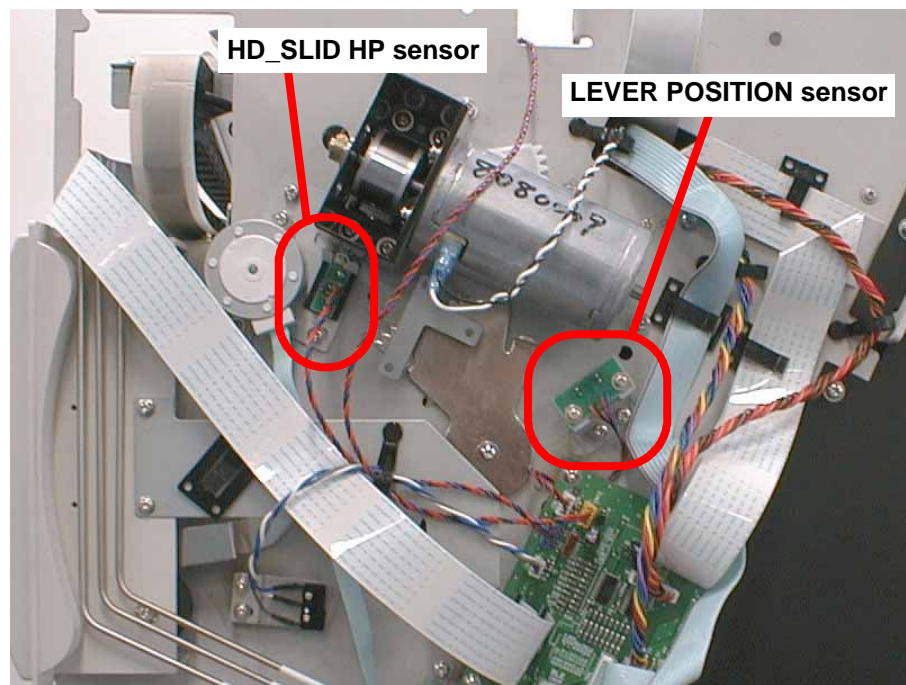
LEVER POSITION / HD_SLID HP sensor removal
